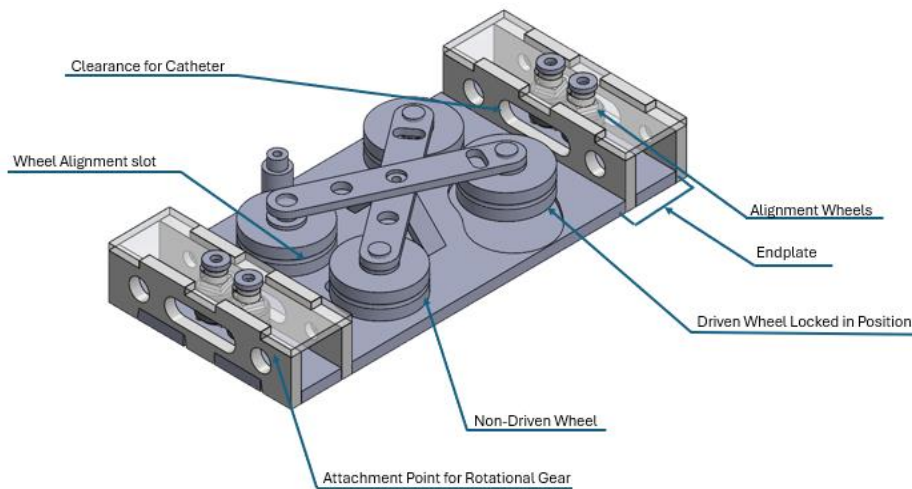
CAD rendering of S-shaped catheter layout of testing prototype
